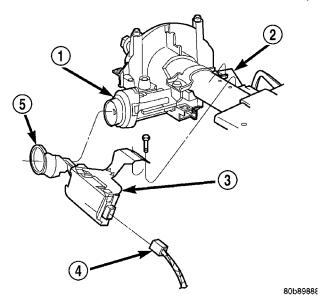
SENTRY KEY IMMOBILIZER MODULE (SKIM)
